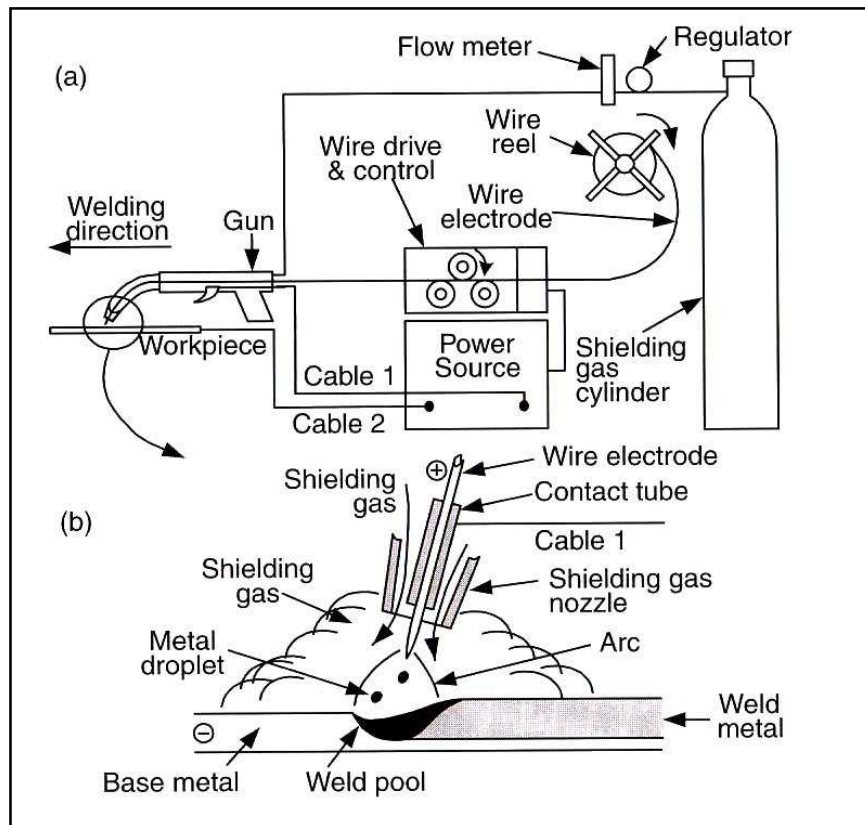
Flux-core arc welding (a) overall process; (b) welding area [88]
